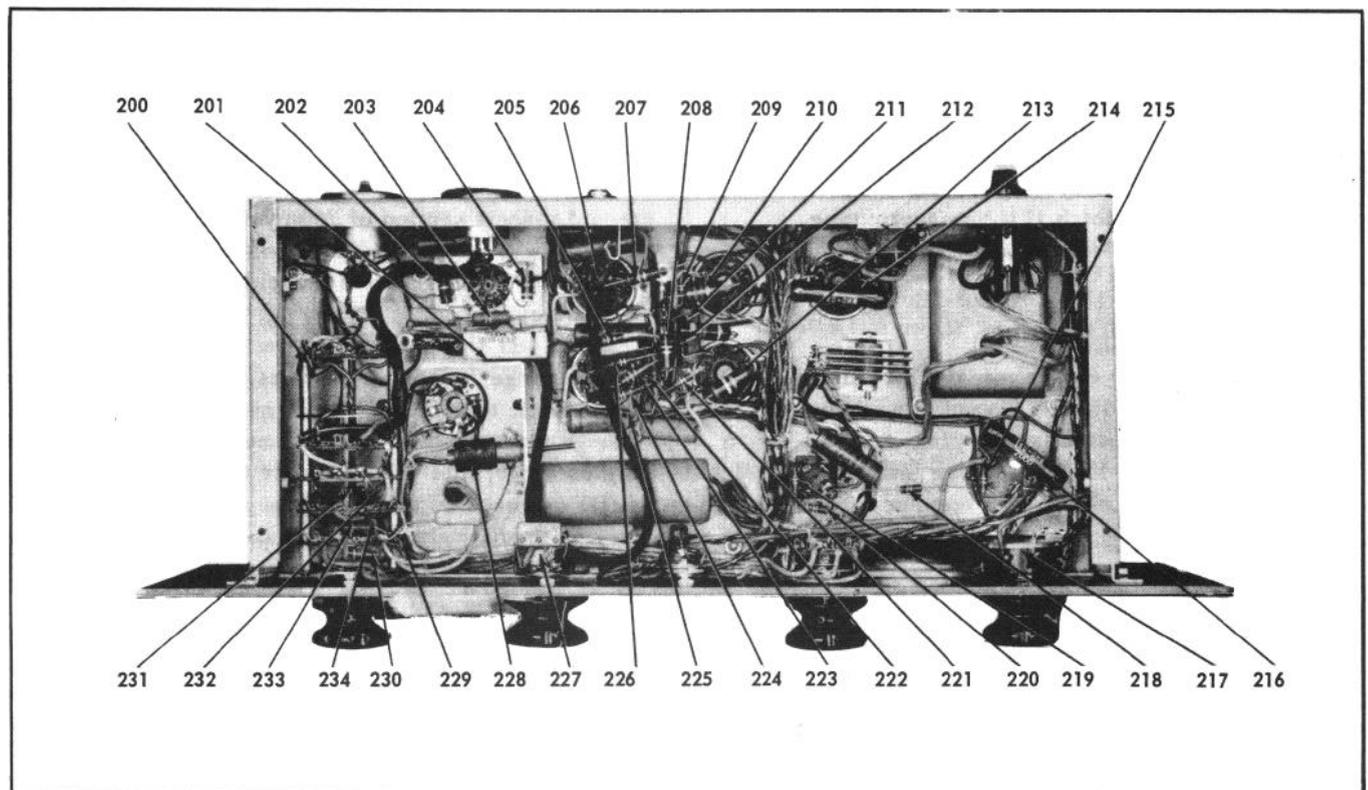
Bottom View of PT6-6J Amplifier Chassis.
